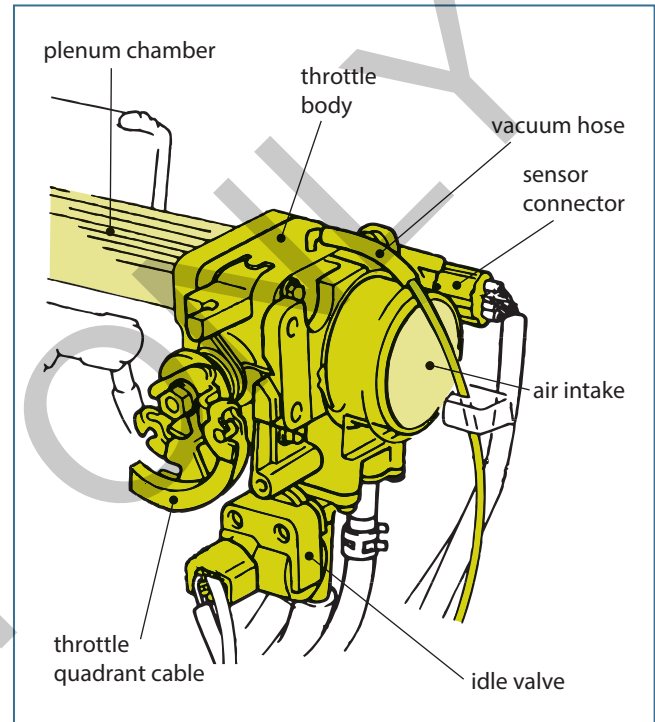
Throttle body assembly for an EFI system TOYOTA
